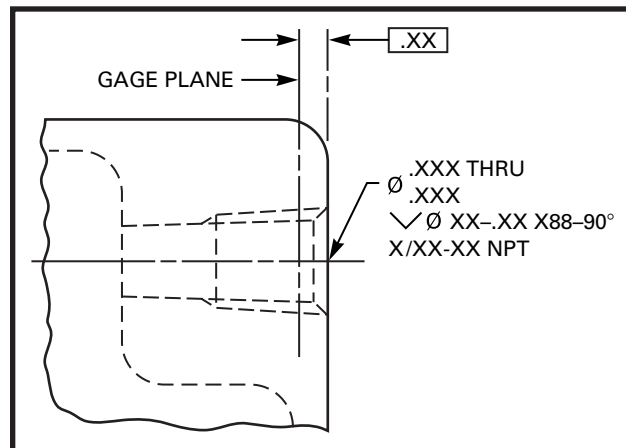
SPECIFYING INTERNAL TAPER THREAD DESIGNATIONS
